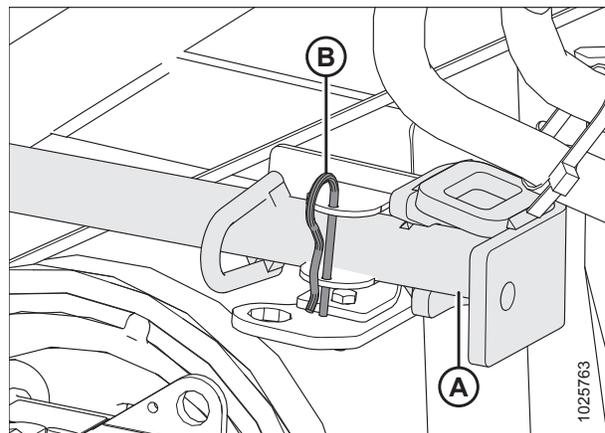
Knife Guard Straightening Tool in Storage Position (with New Bracket)
